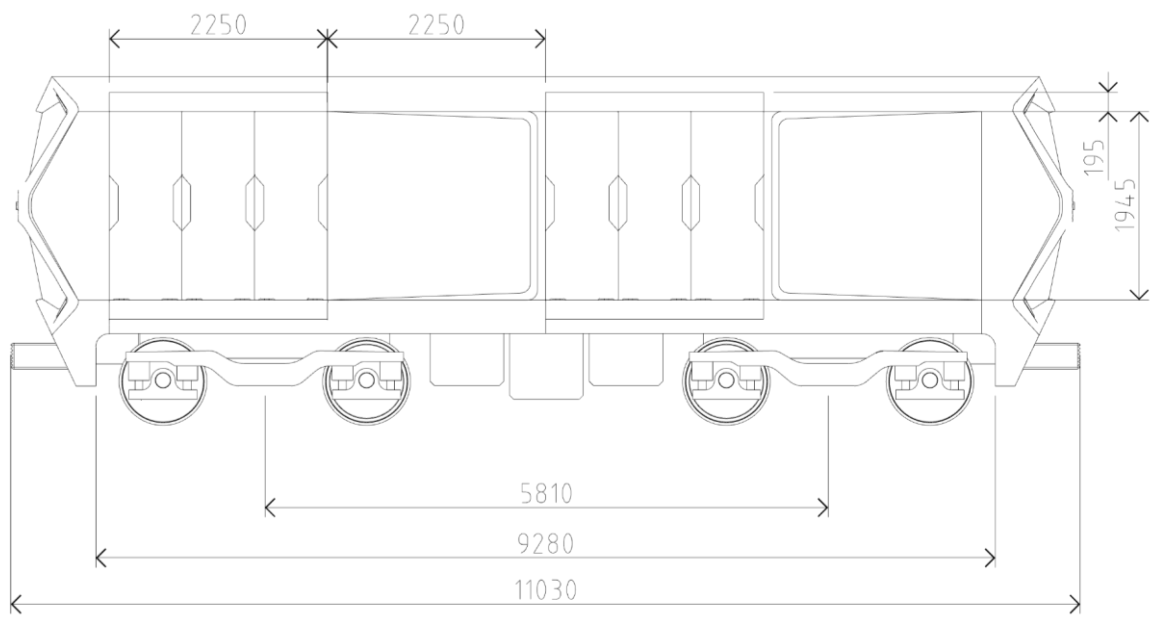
Main dimensions of the unit, side view (in millimetres)
